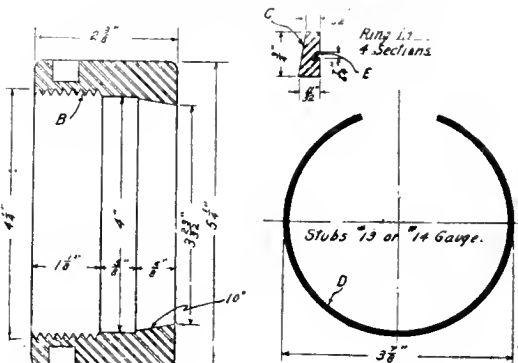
CHUCK FOR HOLDING BUTT END OF SHELL WHILE BODY OF LATTER IS BEING GROUND.
